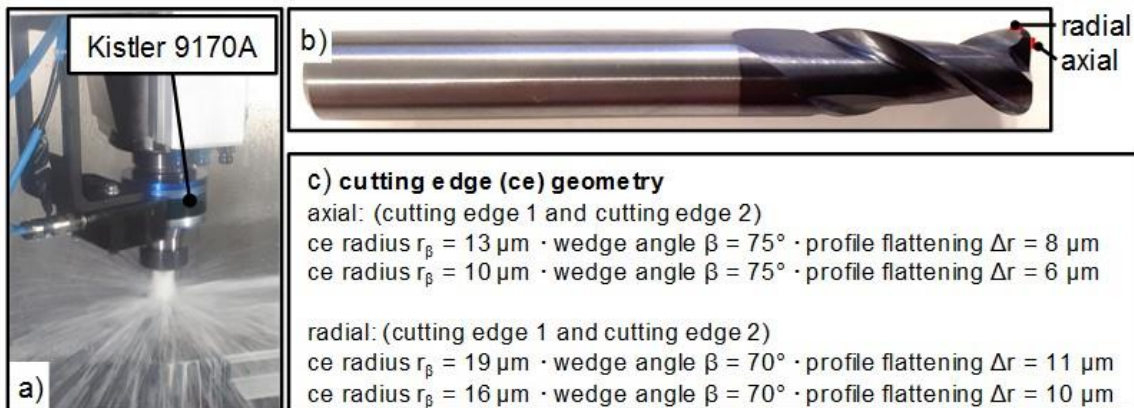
a) setup of the machining process, b) image of the end mill prototype, c) geometrical measurement of the end milling prototype
